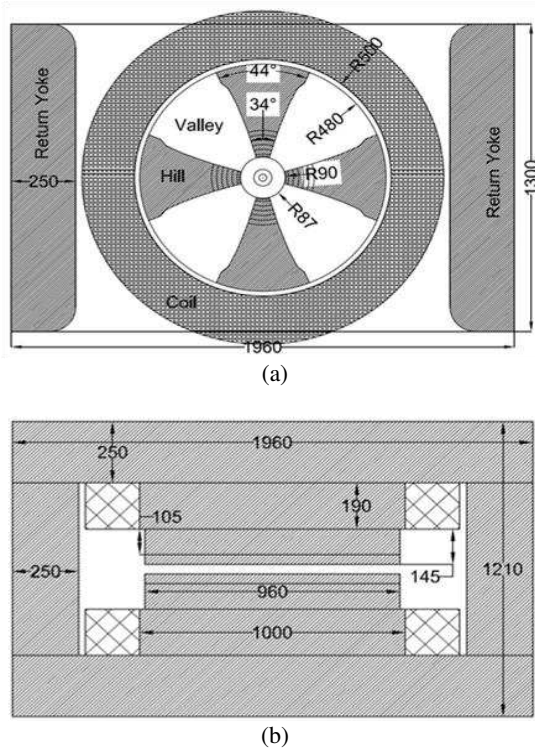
Cyclotron magnet dimension (a) Median plane poles view and (b) Side view.
